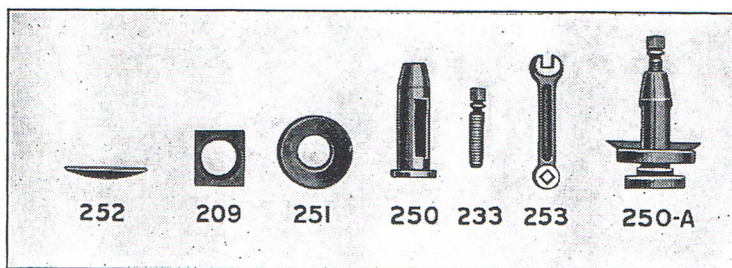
Tool Post Parts for 9' "W.S." Lathes—Models A, B, and C.
